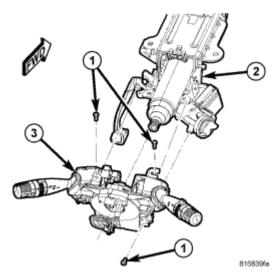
Installing Steering Column Control Module (SCCM) Courtesy of CHRYSLER LLC
